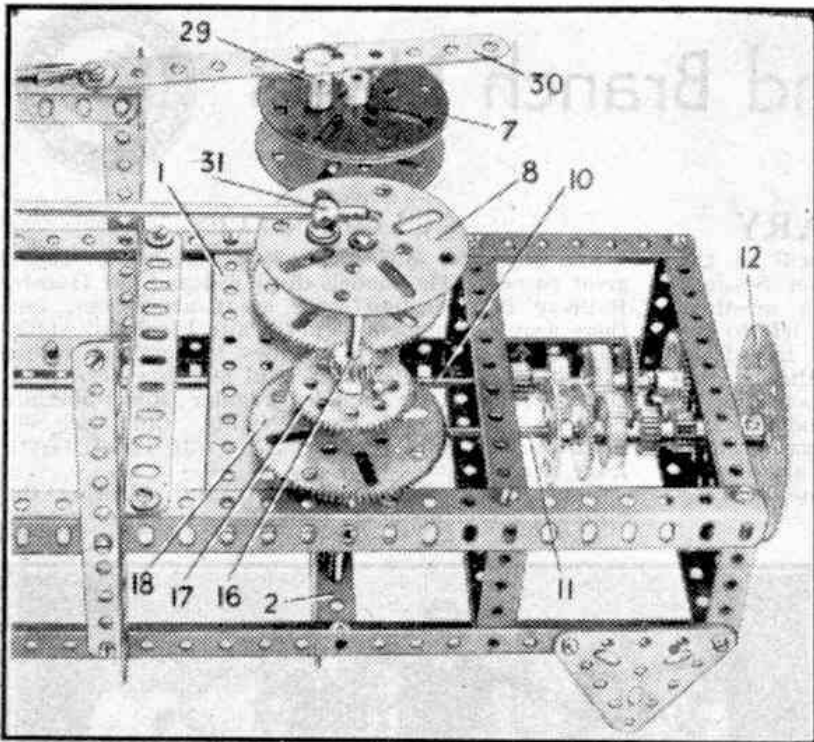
The "crown heads" and main driving gears of the new Meccanograph.
